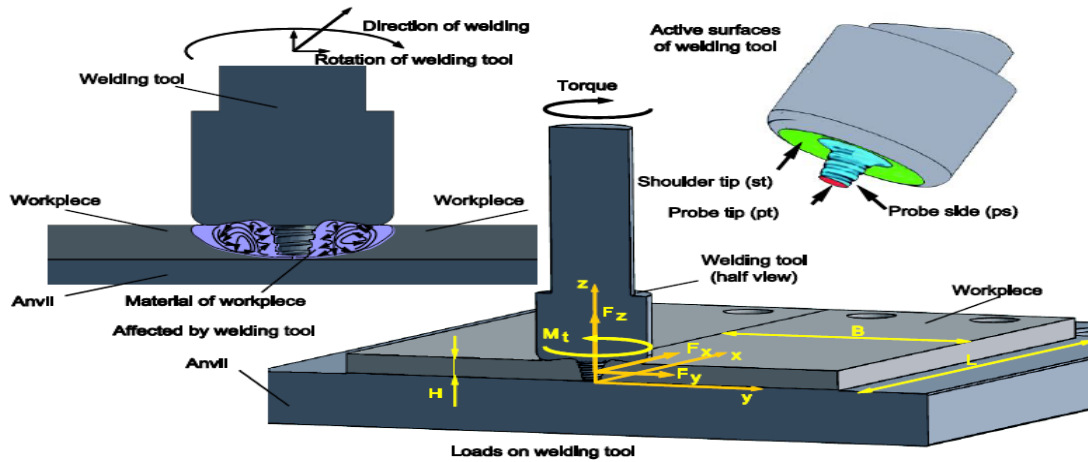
Friction Stir Welding: Principle of Operation [14]
